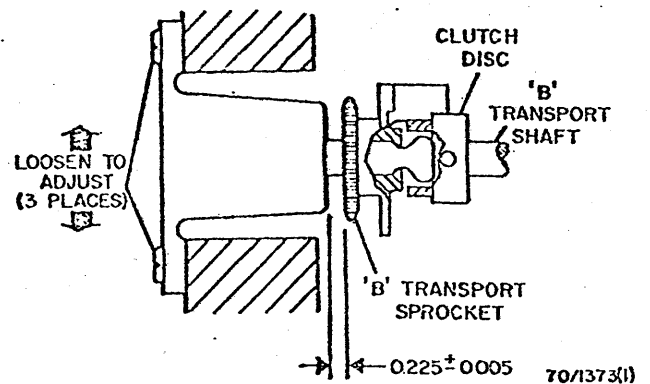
Concentricity of B Transport Sprocket Assembly
